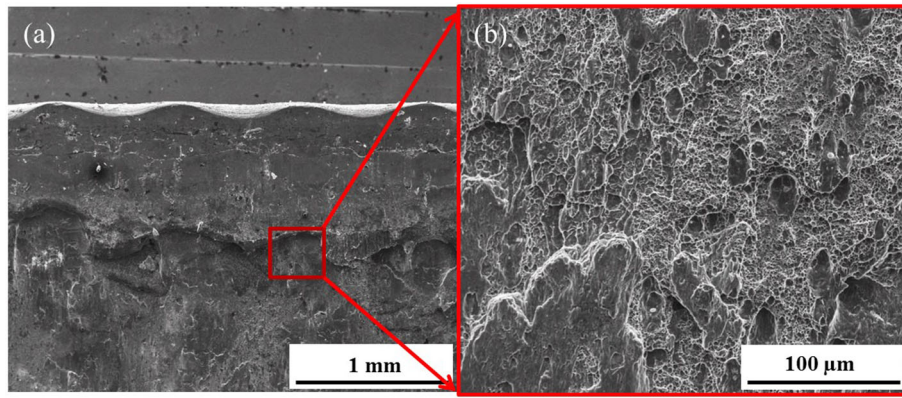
Fractography of shear test fracture: (a) macro-fracture; (b) high-resolution fractography of the surface in (a)
